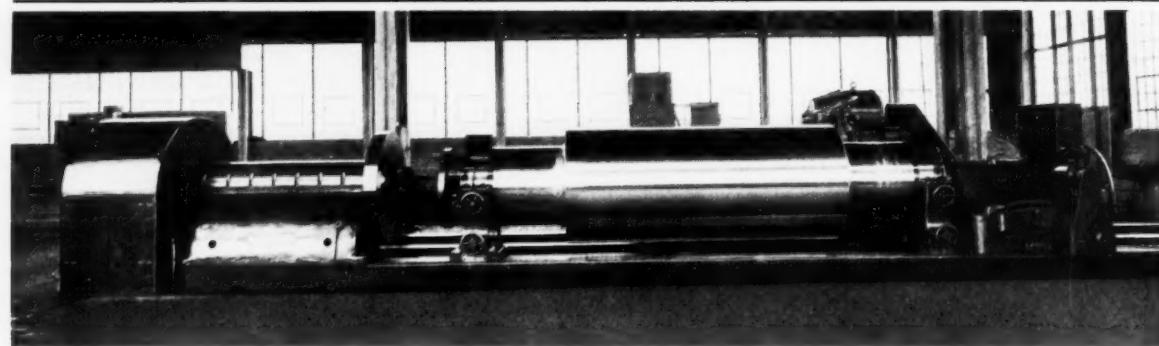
Front View of Landis 60-inch Swing Roll-grinder
